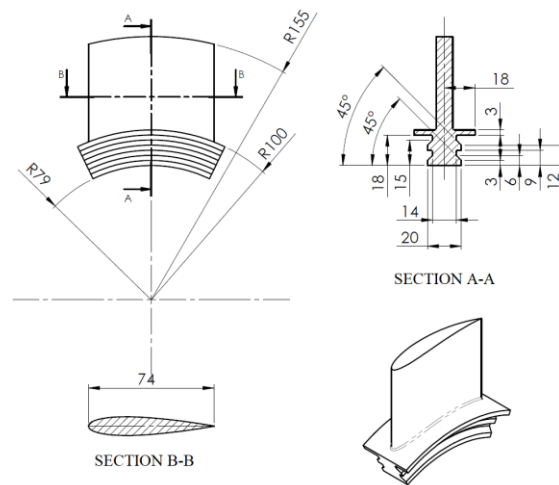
Detailed drawing of the small-scale Wells turbine.
